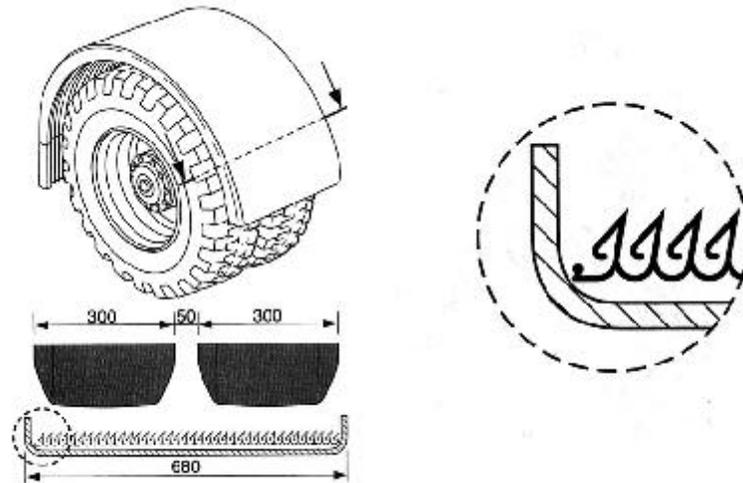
Cross-section of mudguard with grooved section, after H. GÖTZ and R. SCHOCH [9.40].
